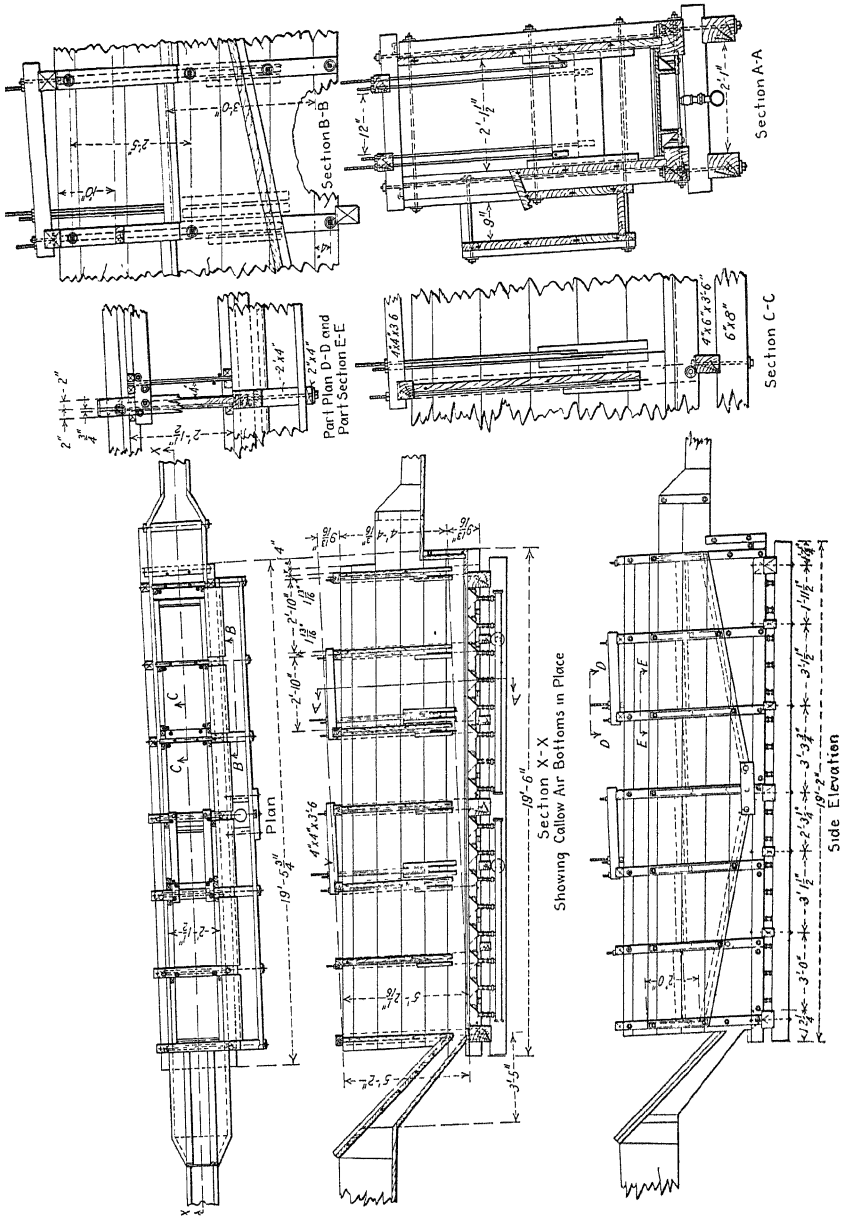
EXPERIMENTAL INSPIRATION FLOTATION MACHINE.
